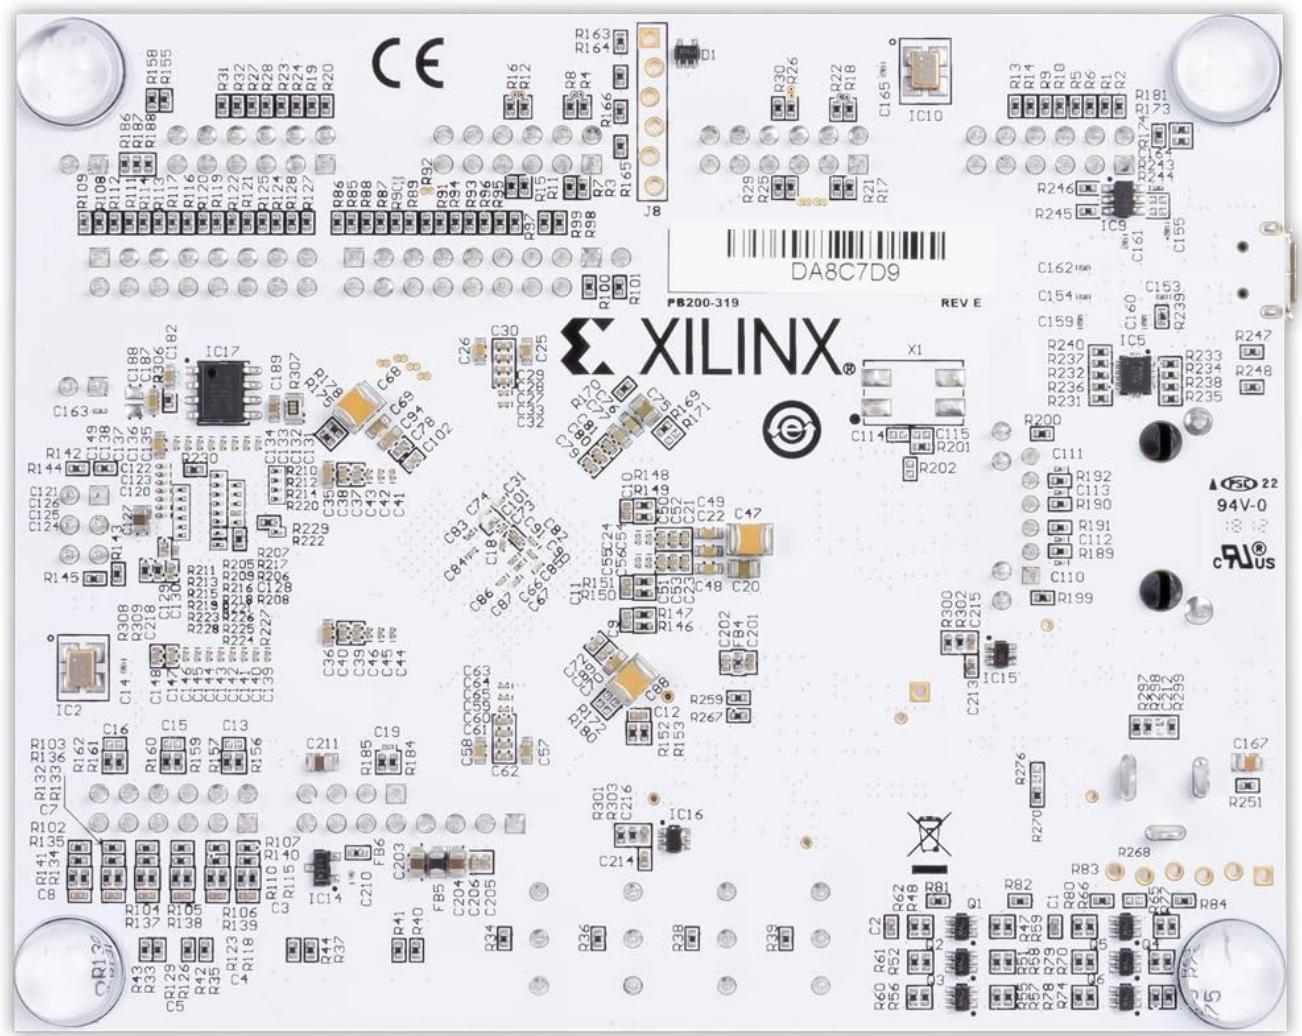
Bottom view of the Arty A7-100T board, showing solder points and regulatory markings.
